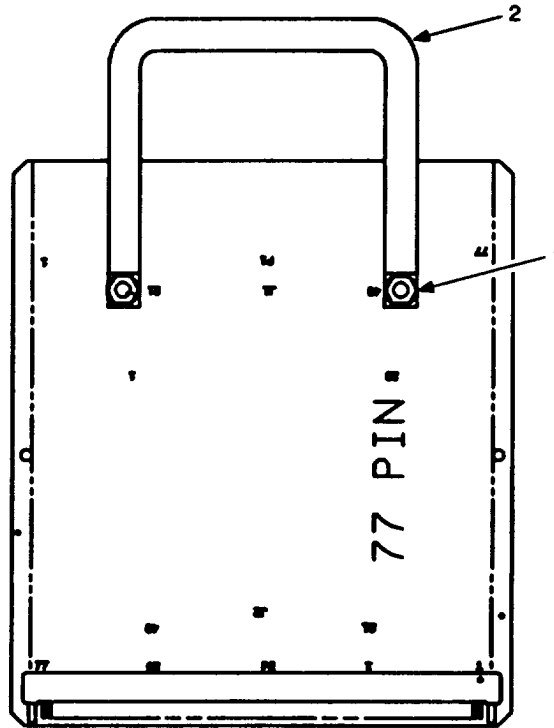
Shorting Card-77 Pin Connector Component Layout
